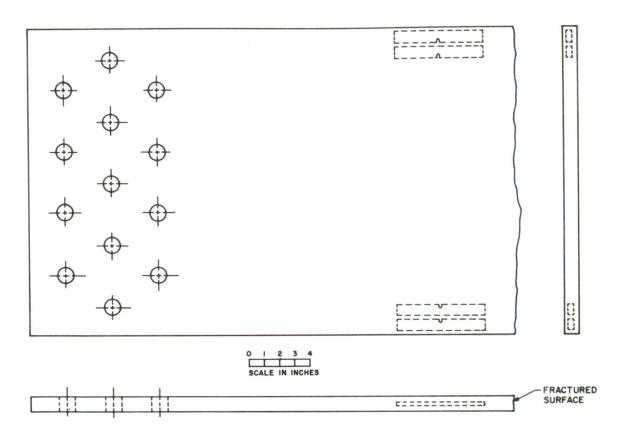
Large Aluminum Plate and Area of Specimen Removal
